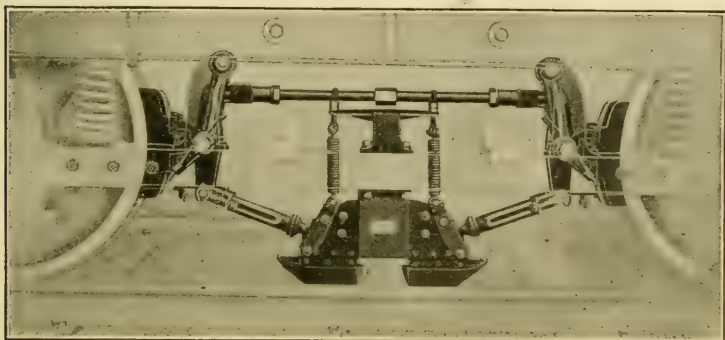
Transparent View of Braking Equipment, Showing Method of Attaching the Brakes.
